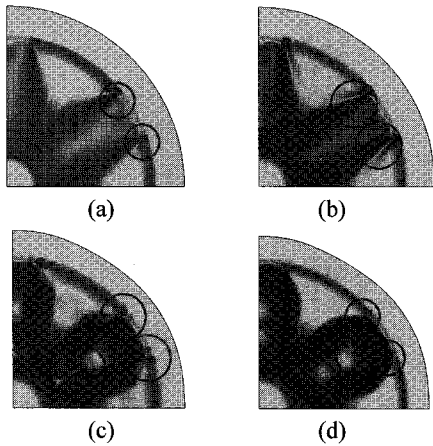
Deformed shapes of the tools and the blank during the stamping analysis of the pulsator cover with stage 1 of Case1 at the stroke of : (a) 22.57 mm; (b) 34.35 mm; (c) 48.1 mm; (d) 56.17 mm
